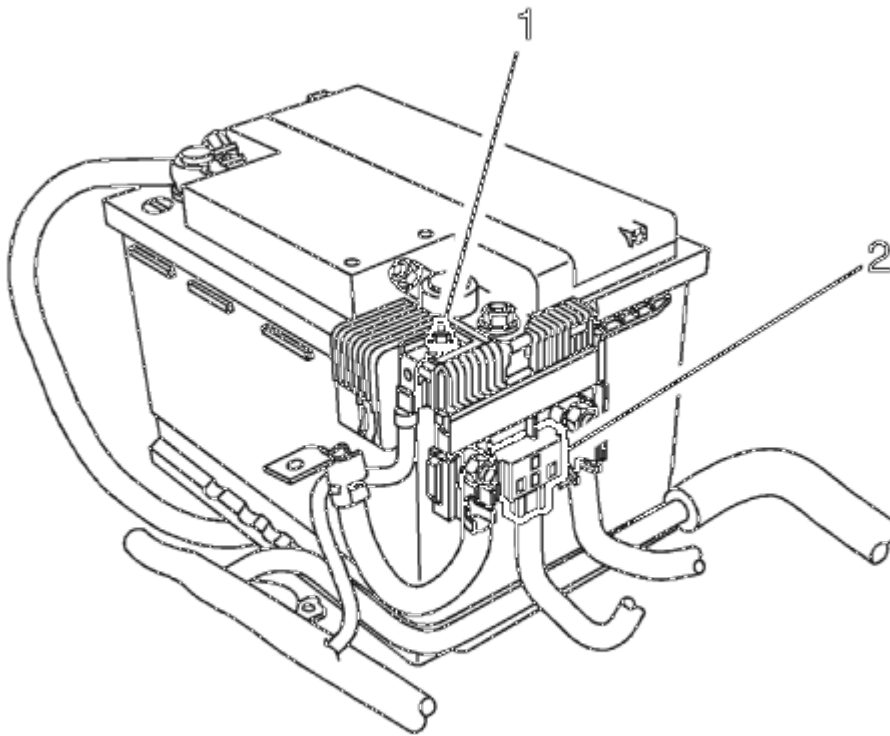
Body Wiring Harness Connector & Positive Cable Nut
